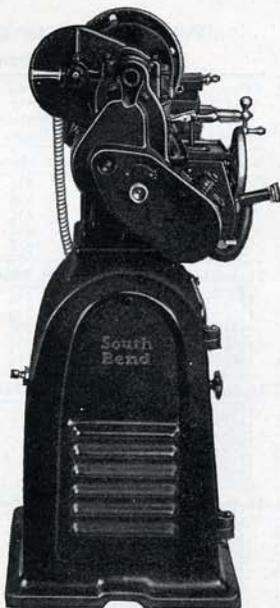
End view of Underneath Belt Motor Driven Lathe.
